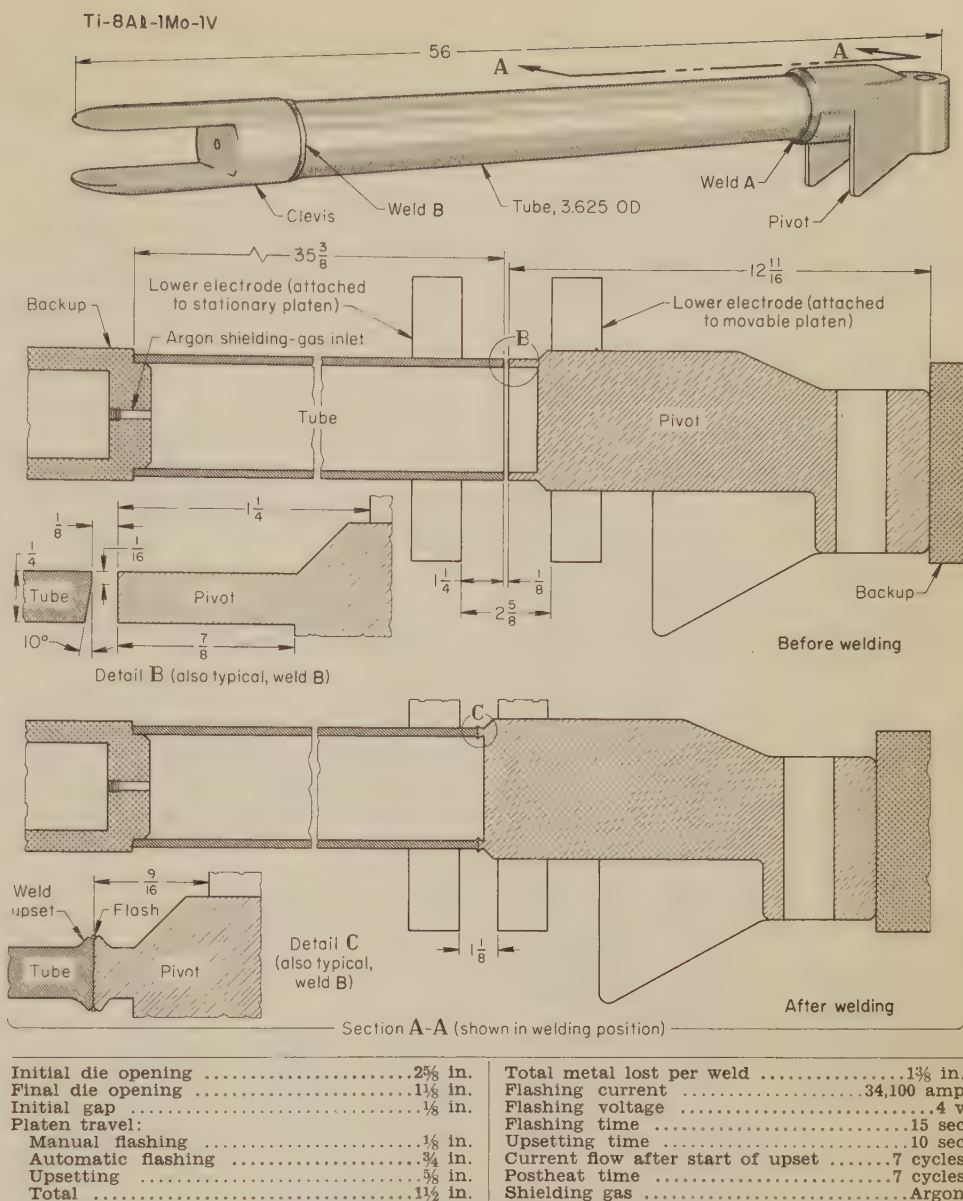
Drag strut made by flash welding two Ti-8Al-1Mo-1V titanium alloy forgings to the ends of a tube made of the same material, under the conditions given in the table, and setup for gas shielding and flash welding one of the joints (Example 444)
